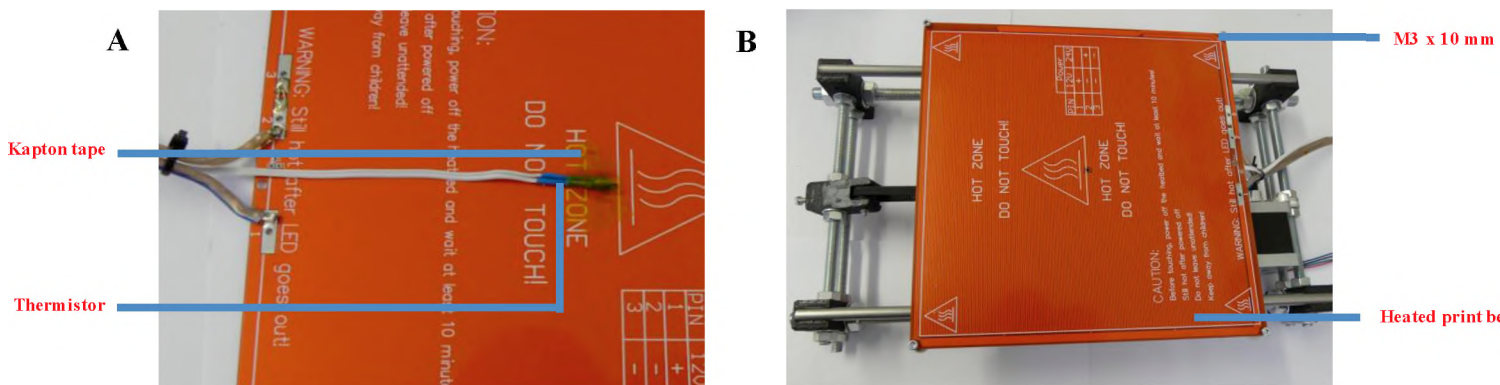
Heated print bed assembly. A: Print bed thermistor. B: Mounted heated print bed.
